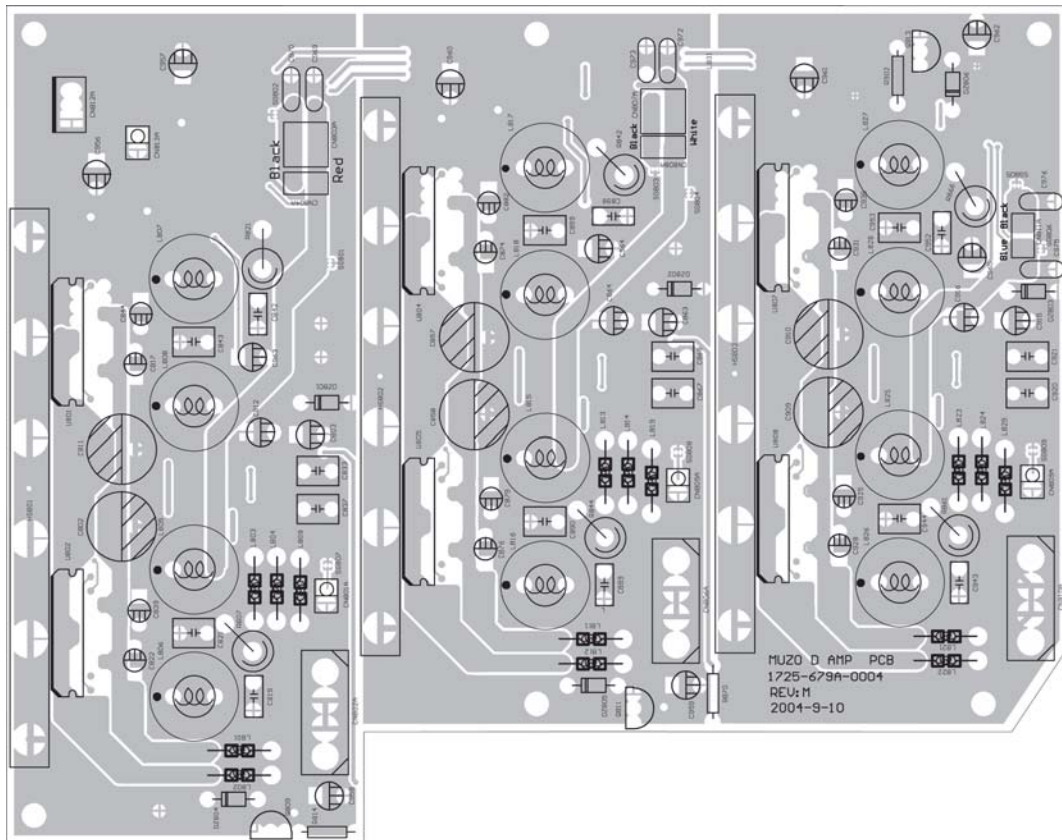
Class-D Amplifier PCB Assembly, P/N: 306282, Top Etch Layout
